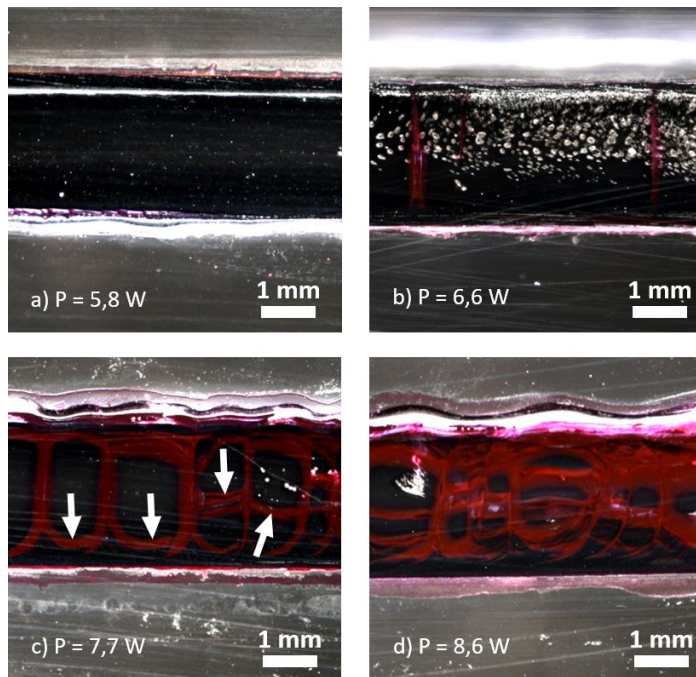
Top view of weld seams created with a laser power of 5,8 W (a), 6,6 W (b), 7,7 W (c) and 8,6 W (d), laser wavelength 980 nm, feed rate 10 mm/s, crack initiating medium: Crack-Knacker PS-2;
